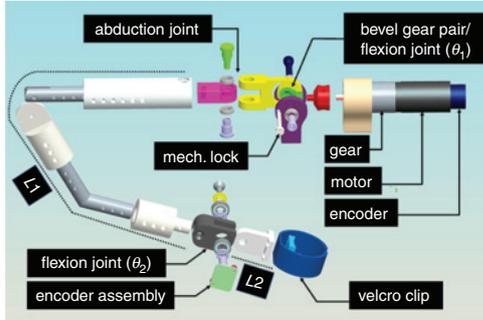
CAD model of proposed finger mechanism (exploded view)
